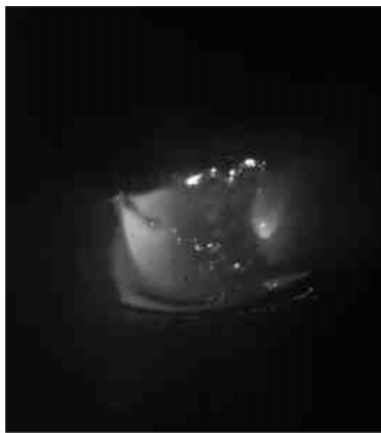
High speed photographs of droplet transfer for He65% + Ar32% + CO₂3% shielding gas in hybrid welding with optimized parameters
